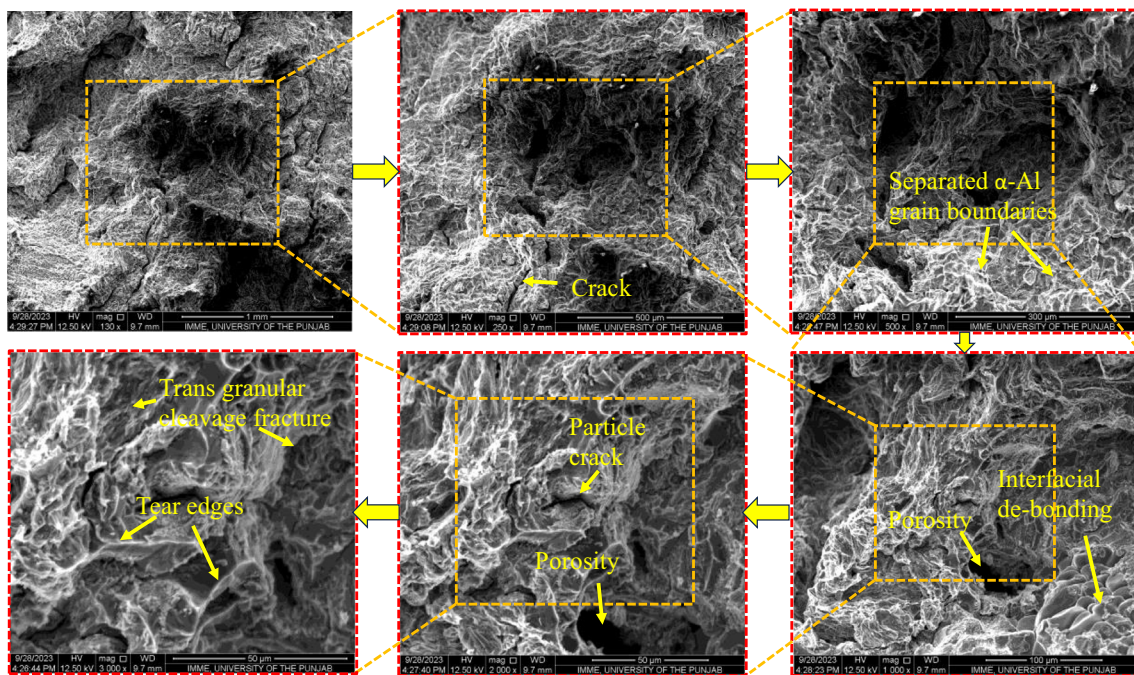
SEM analysis of the fractured surface of squeeze-casted AA2024/2%Al₂O₃/2%SiC hybrid composite Charpy impact specimen
